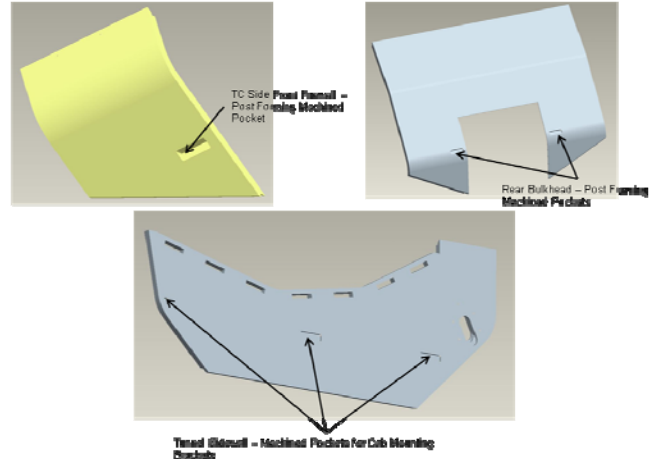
Machined pockets for mechanical locking cab mounting brackets.
